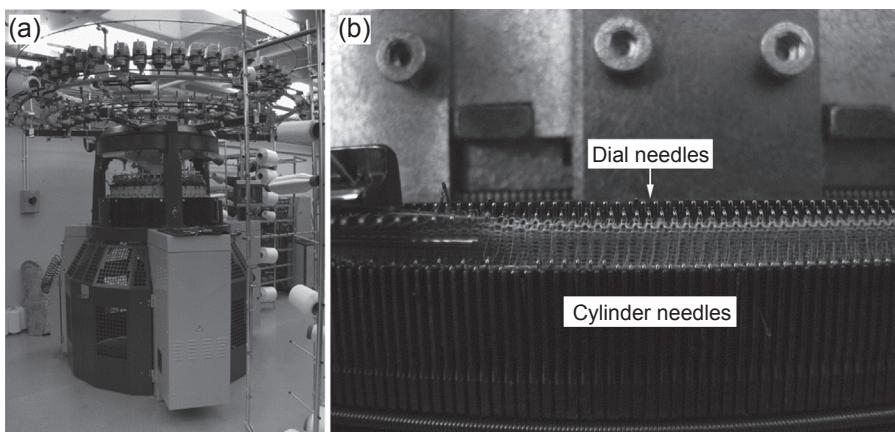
Producing a spacer fabric on a circular weft-knitting machine: (a) a Terrot double-jersey circular machine; (b) knitting a spacer fabric on the circular machine.
